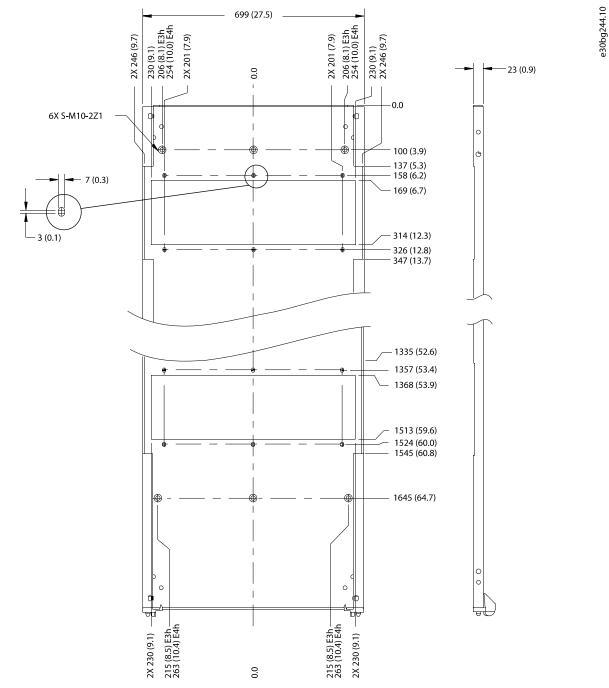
Vent Dimensions for Mounting Plate in 800 mm (32 in) Enclosure
